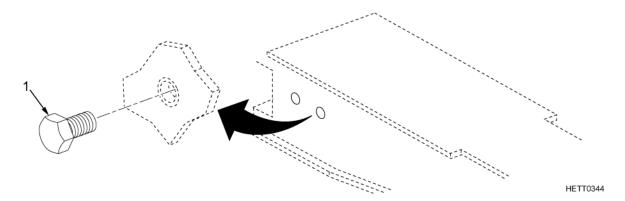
Location N, Pipe Plug Removal, Typical 18 Places.
